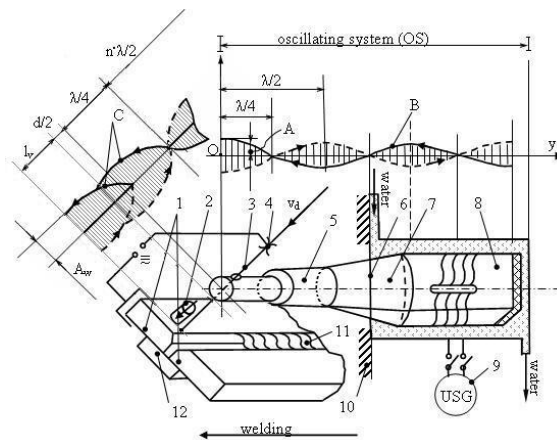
Principle scheme of the submerged arc welding procedure with ultrasonic activation of the electrode wire: 1 - sheet specimens to be welded; 2 - distribution device of welding flux; 3 - electrode wire; 4 - electrical connections; 5 - cylindrical concentrator in steps from Ti-based alloy; 6 - nodal flange; 7 - conical concentrator; 8 - magnetostrictive transducer; 9 - ultrasonics generator; 10 - resistance frame of the welding tractor; 11 - weld; 12 - support; A - oscillation amplitude; B - waves oscillation along the oscillating system; C - waves oscillation along the electrode wire; λ - wavelength; v_d - displacement rate of the electrode wire; l_v - vibration length of the electrode wire; A_w - maximum amplitude of the electrode wire; ————progressive wave; - - - - - regressive wave.
